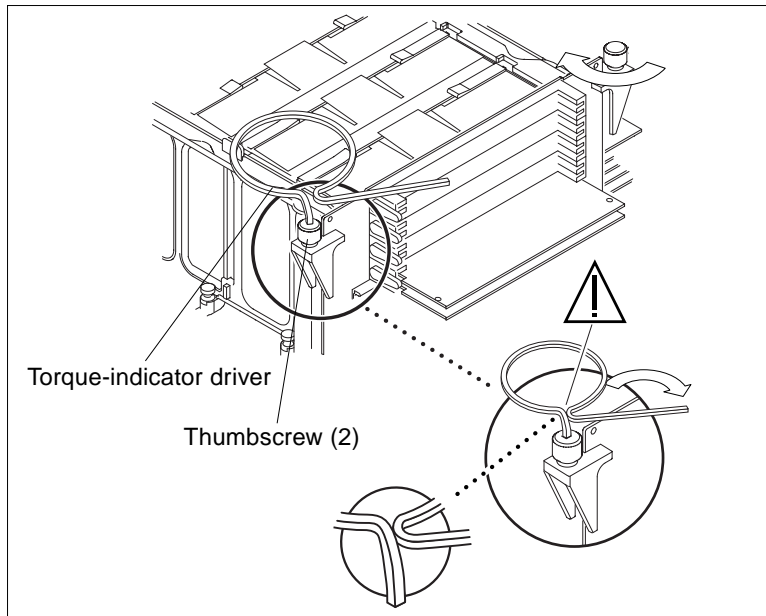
Setting the Memory Riser Assembly Thumbscrew Torque
